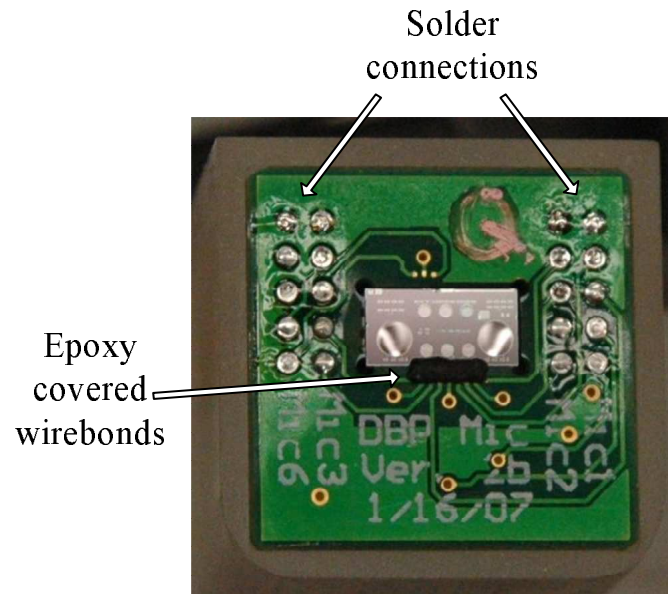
Photograph of the microphone embedded in the printed circuit board.
